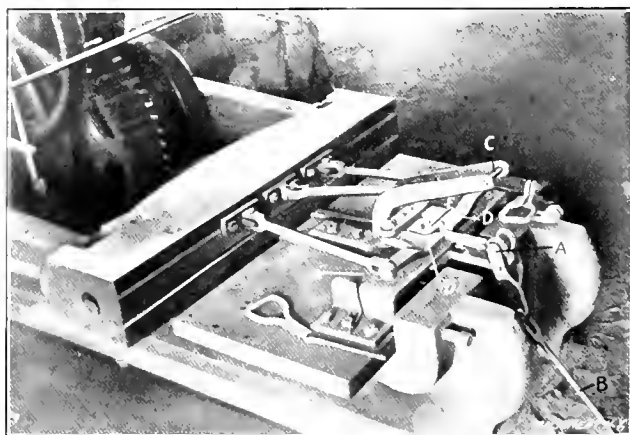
Brake Hanger Former in Position at Forward End of Stroke
